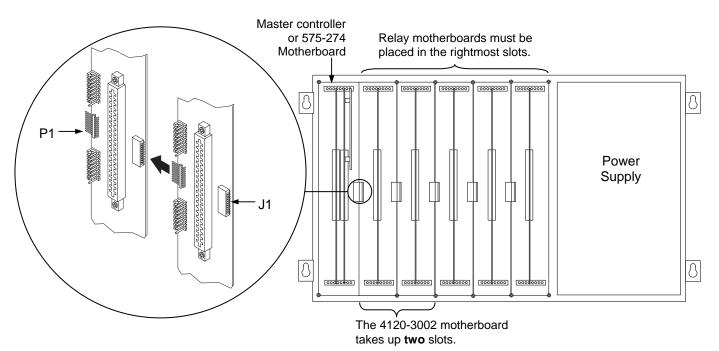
Installing the Motherboard into a 4100 Master Controller Bay
